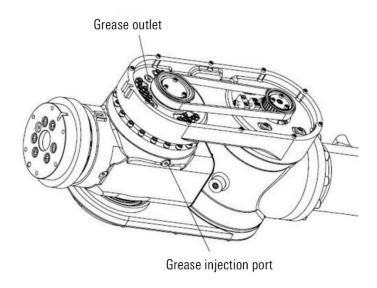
Replace the lubricating grease of J5 axis reducer
